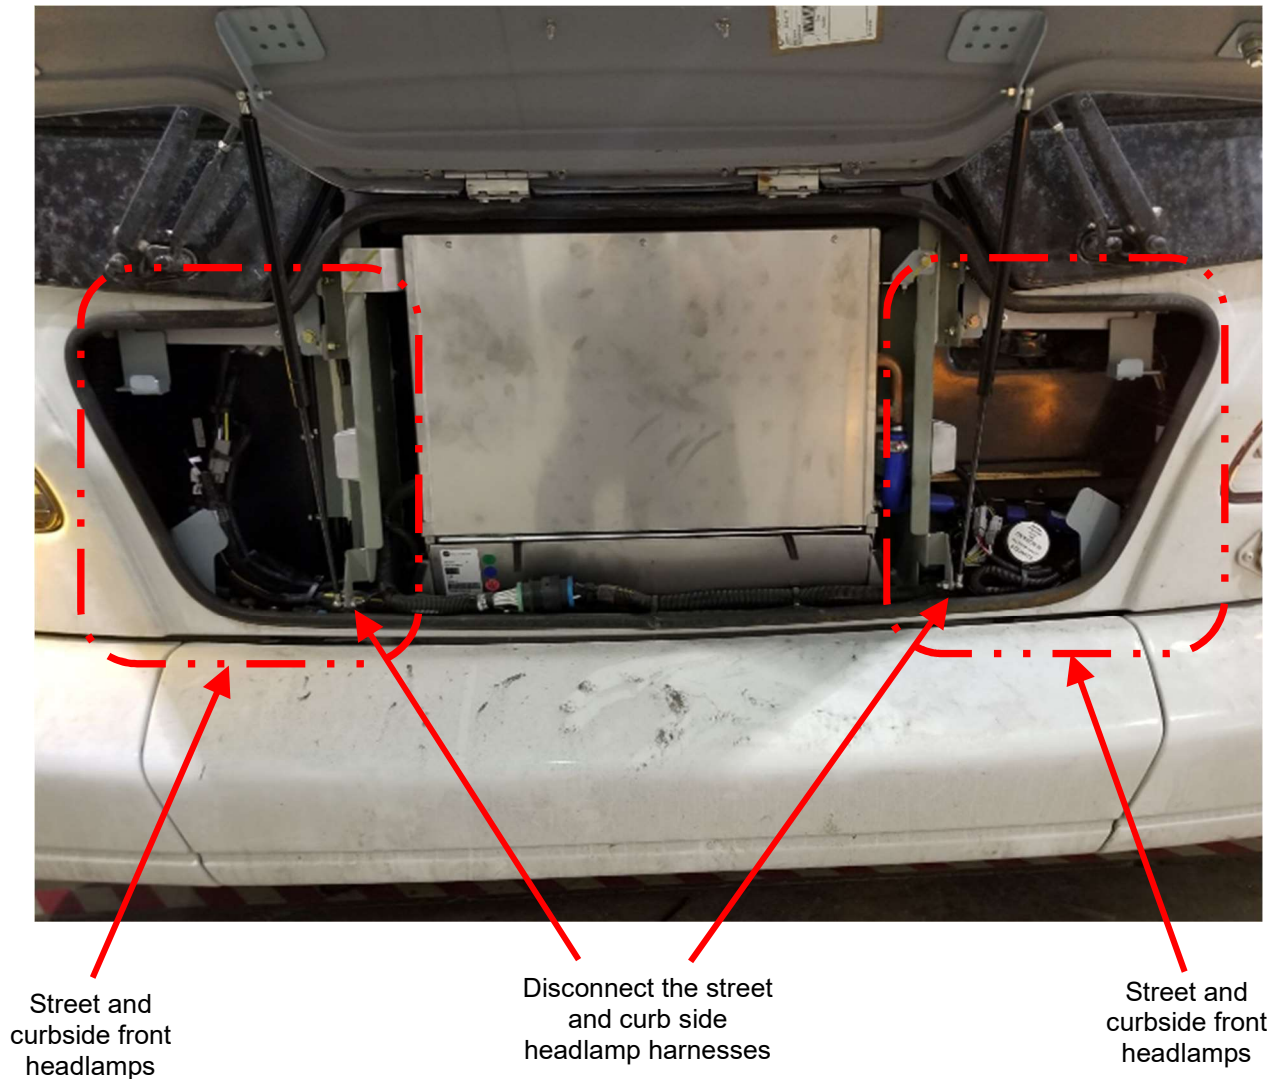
CS and SS Headlamp Assembly Adapter/Main Harness Location
